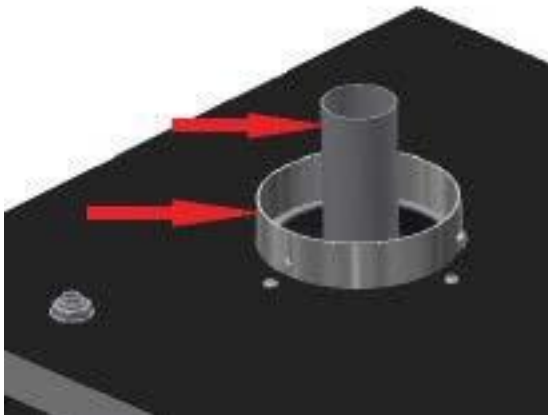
Insert Oxidizer Exhaust Tube, then mount Draft Influencer Assembly to exhaust port flange using (4) screws from the flange
